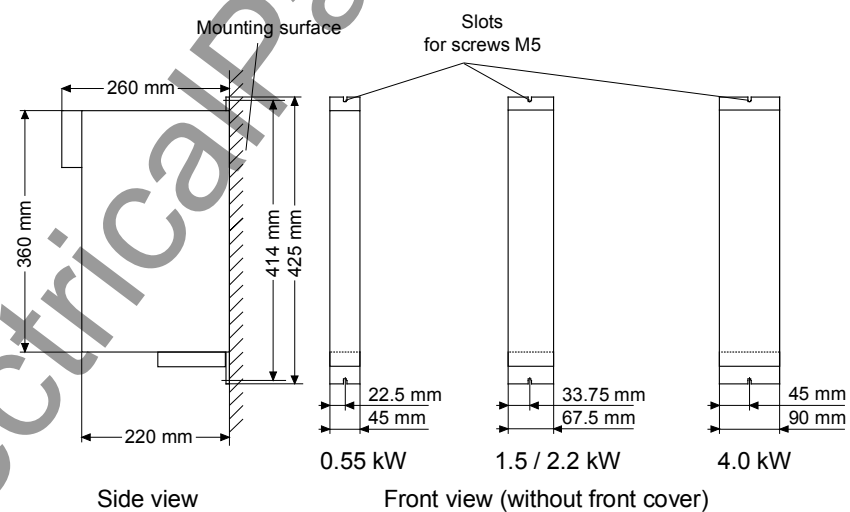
Dimension drawings for housings up to 90 mm wide
